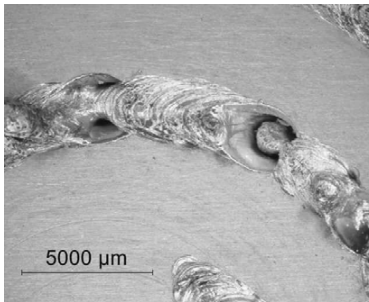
Top surface photograph of Nd:YAG laser welding; seam is bent because the gas chamber did not permit a linear seam; chamber was filled with argon; $P_{Nd:YAG} = 3 \text{ kW}$; $v_w = 4 \text{ m min}^{-1}$; bead on plate; EN AW-6060; angle $\varphi = 6^\circ$
